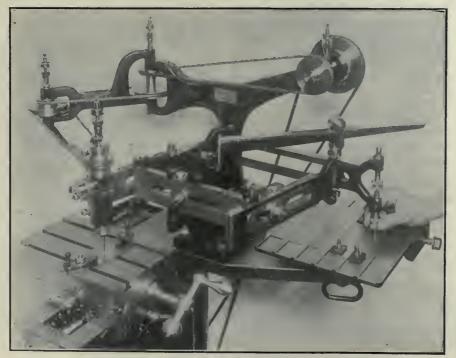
TABLES AND MECHANISM OF MACHINE SHOWN IN FIG. 1.
